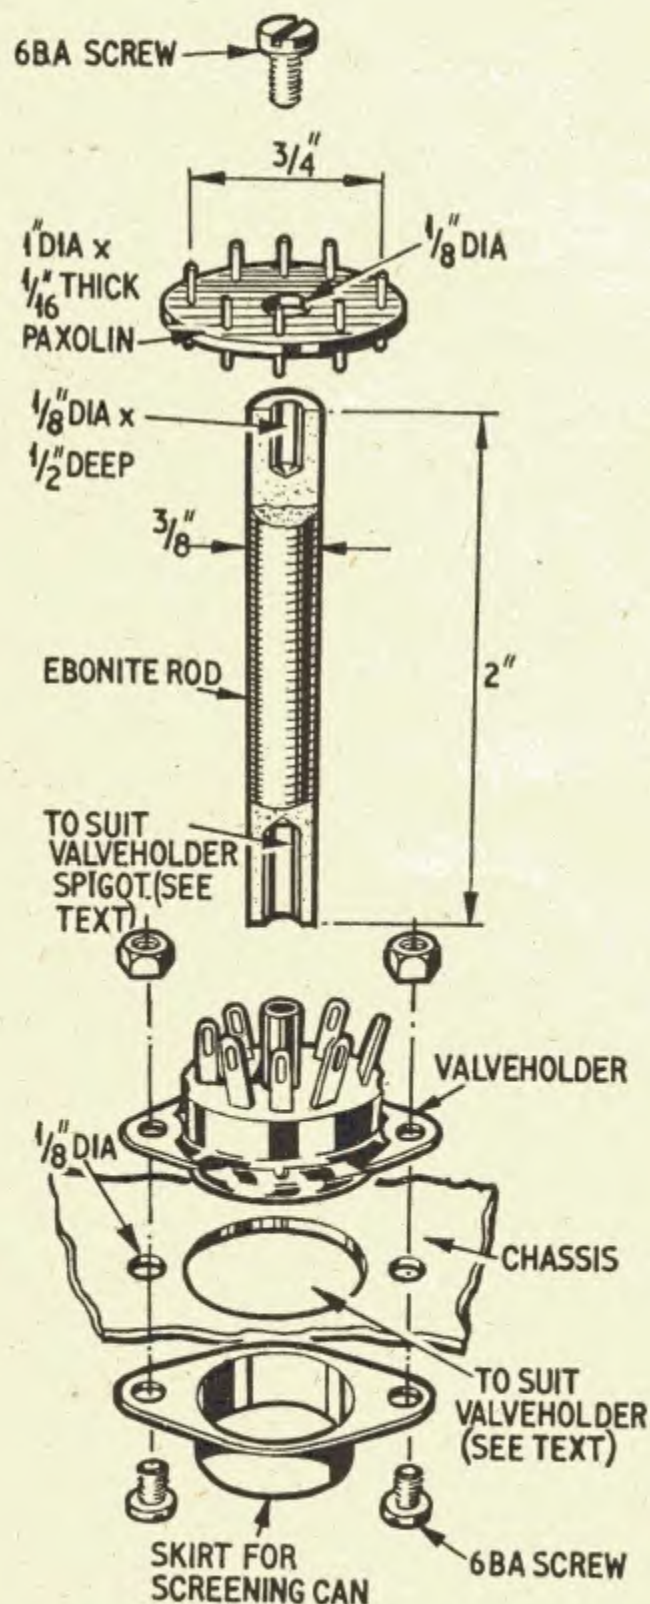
Exploded view of the module showing the construction, dimensions and chassis drilling details
